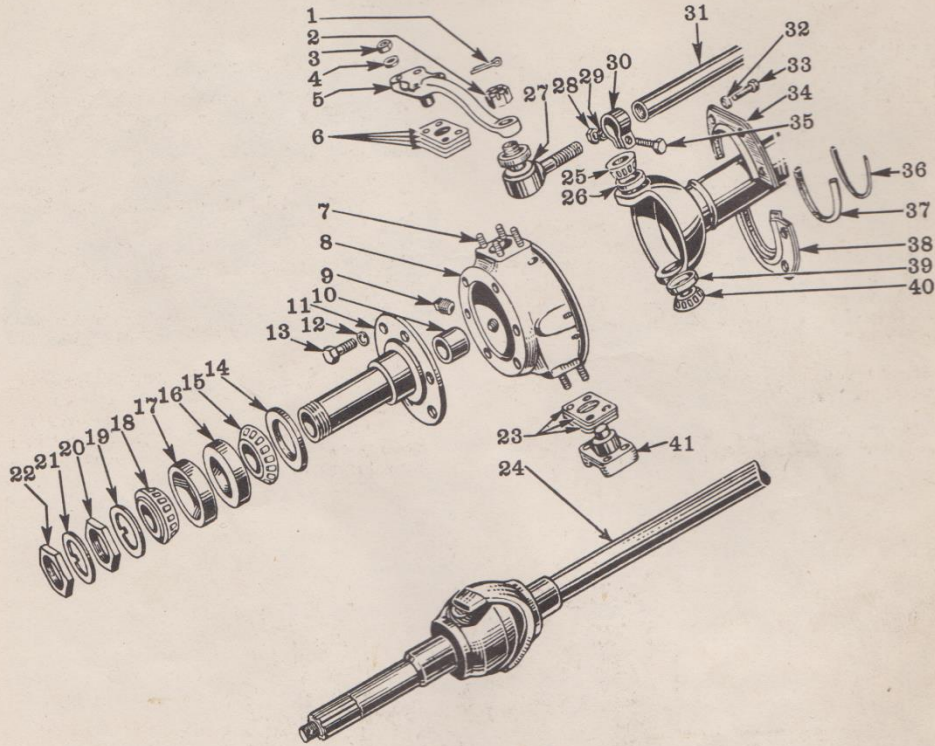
FRONT AXLE, STEERING KNUCKLE AND WHEEL BEARINGS
